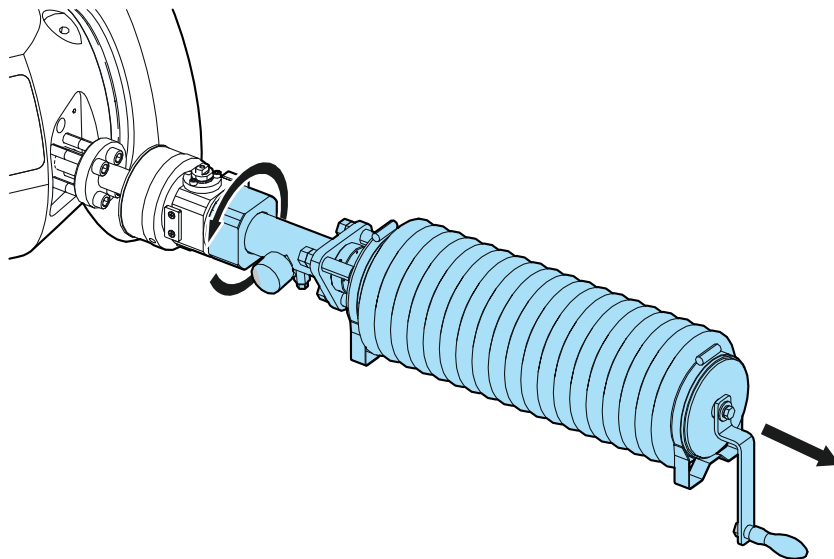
Dismounting the spindle assembly from the ball valve assembly
